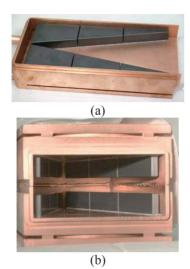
HOM damper assemblies: (a) copper damper half with soldered SiC tiles and (b) ebeam welded prototype damper assembly.
